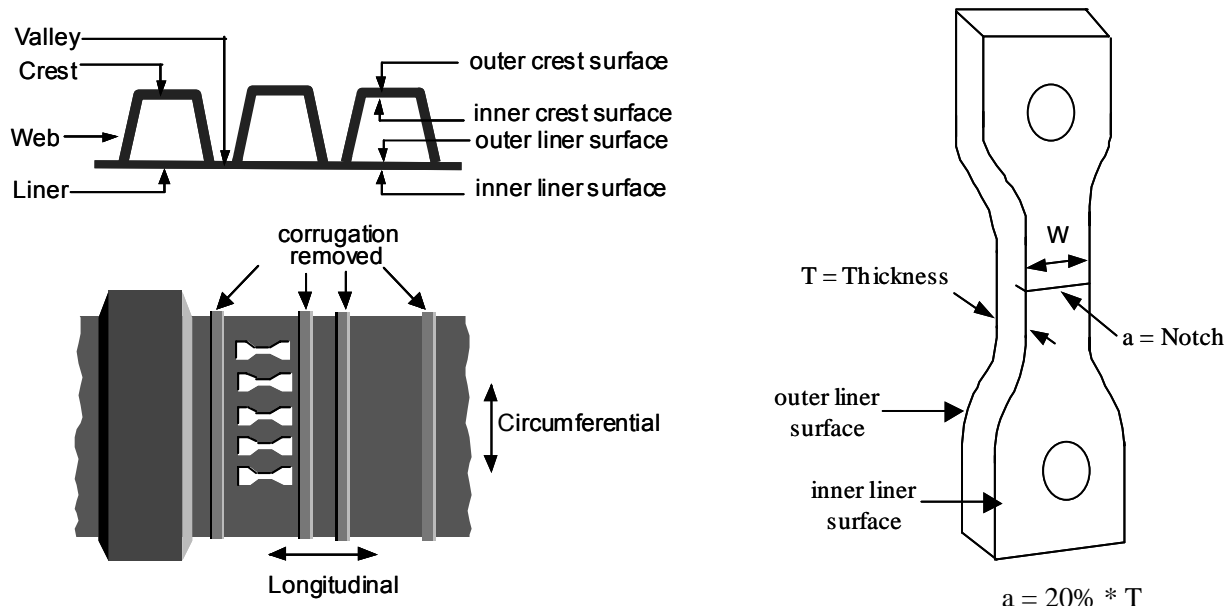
Location of the test specimens taken from the pipe liner and notch location on the specimen
